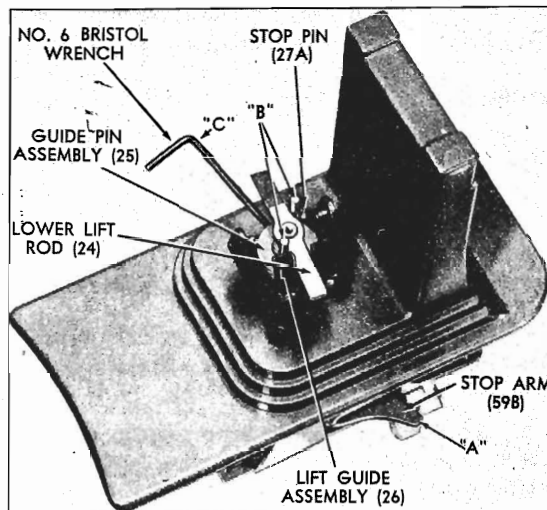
RE-POSITIONING GUIDE PIN ASSEMBLY
